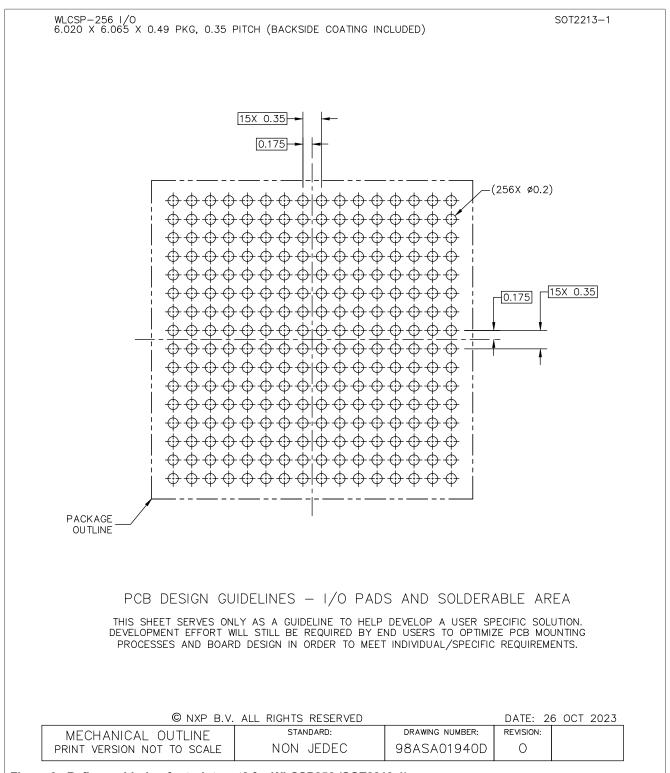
Reflow soldering footprint part2 for WLCSP256 (SOT2213-1)
